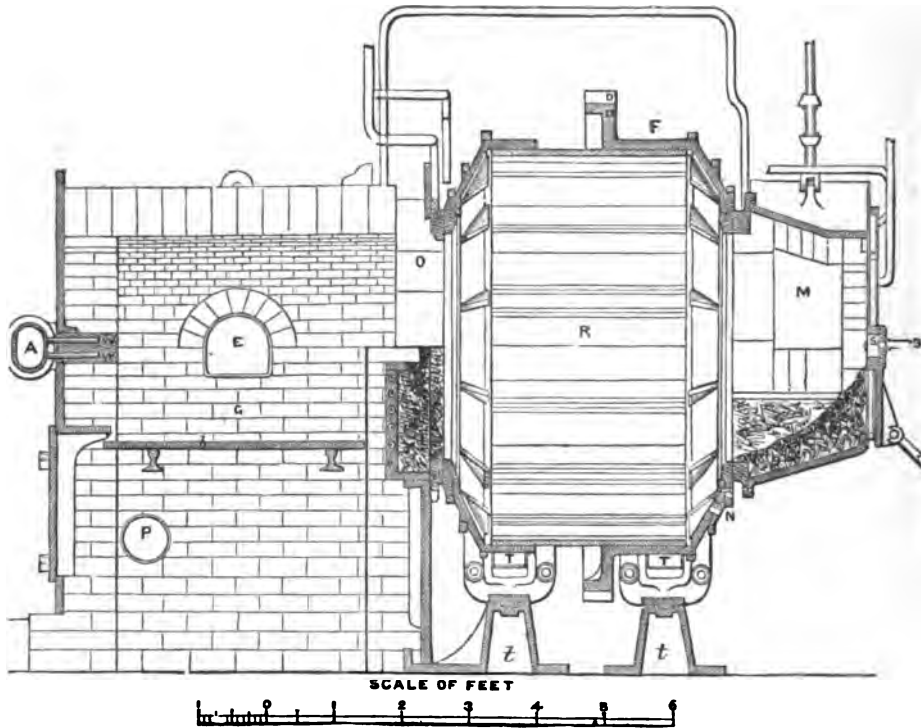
is a sectional elevation; Fig. 4360 a cross-section of revolving chamber; Fig. 4361 a horizontal section of revolving chamber; Fig. 4362 an elevation of movable end-piece and flue; Fig. 4363 a front sectional elevation of squeezer; and Fig.
